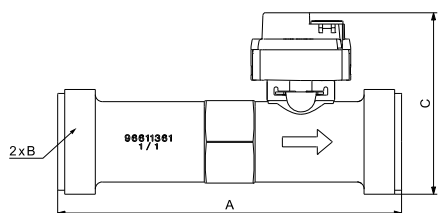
Dimensions, MFS 20-200 l/min, without adapter
